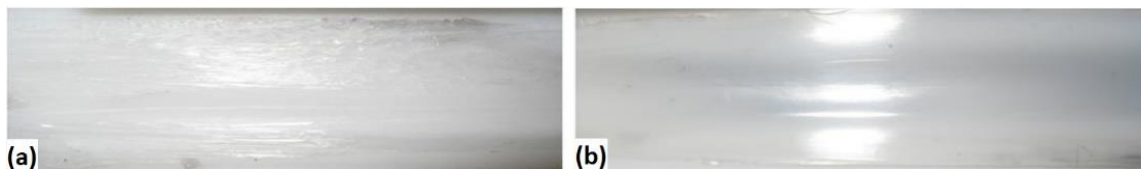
Effect on the surface finish of the weld with an hot shoe: (a) without coating and (b) with PTFE coating [48].
